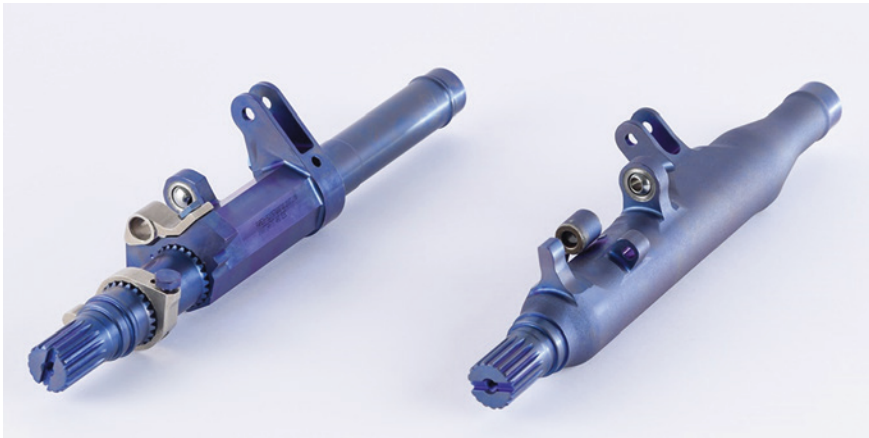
Left hand side: The conventionally latch shaft assembly consists of 10 parts. Right hand side: the newly developed *AM latch shaft* represents a single part which integrates ten parts into one part
